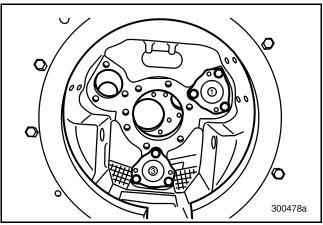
Remaining No. 1 and No. 3 Front Countershaft Bearing Covers
